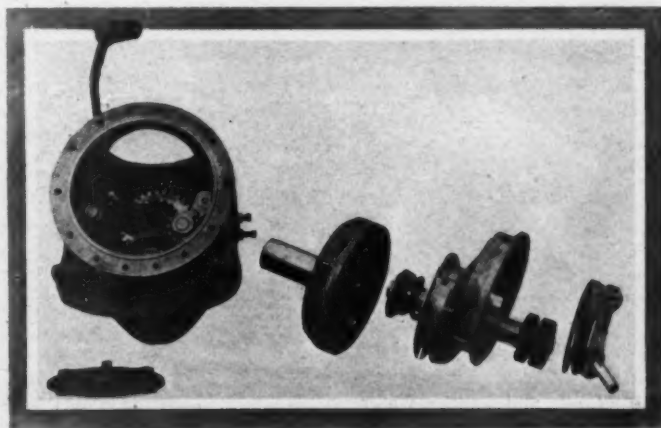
Two-speed sliding gear, multiple disc clutch, and relating parts, with housing and details
